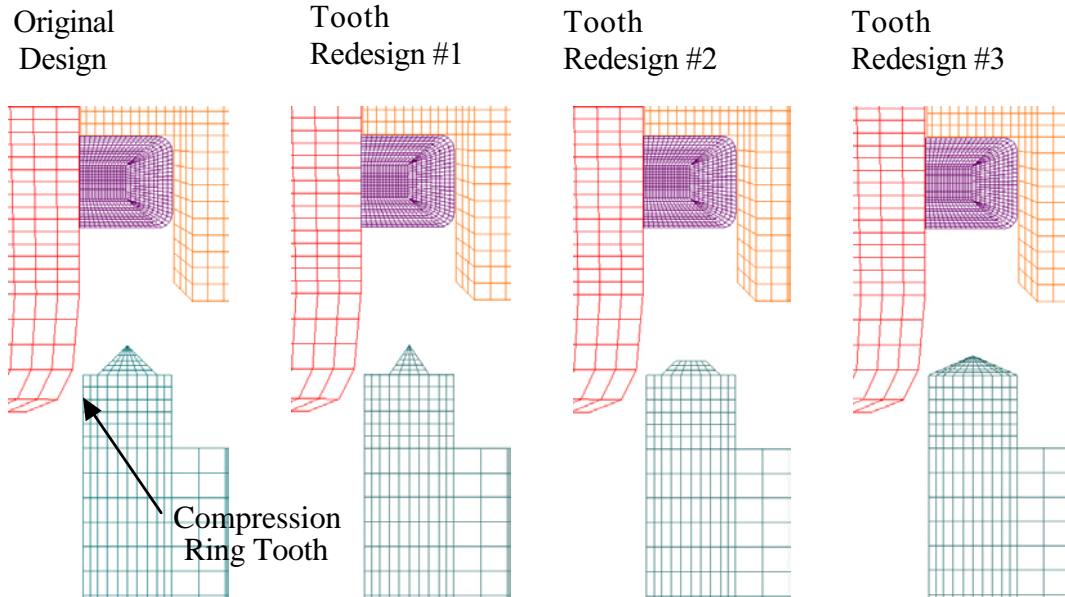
Design changes suggested for the ring compressor's tooth geometry
